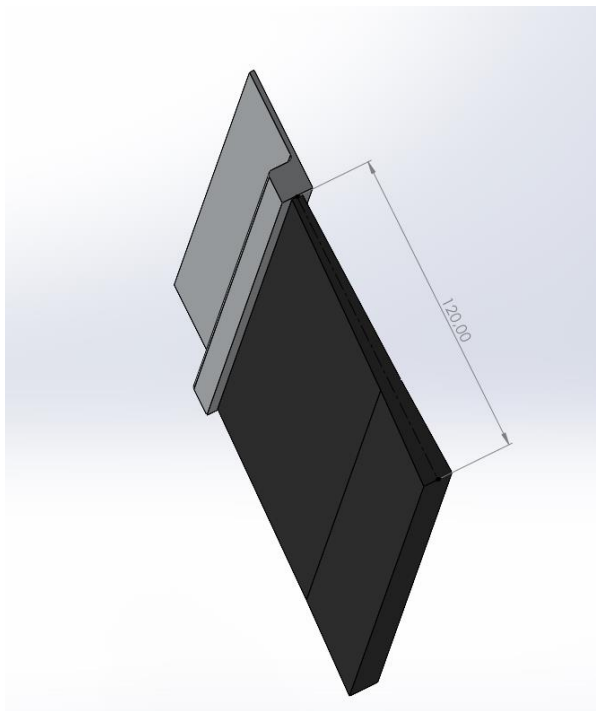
Brush seal modelled in SolidWorks using Raitatuote’s product dimensions.
